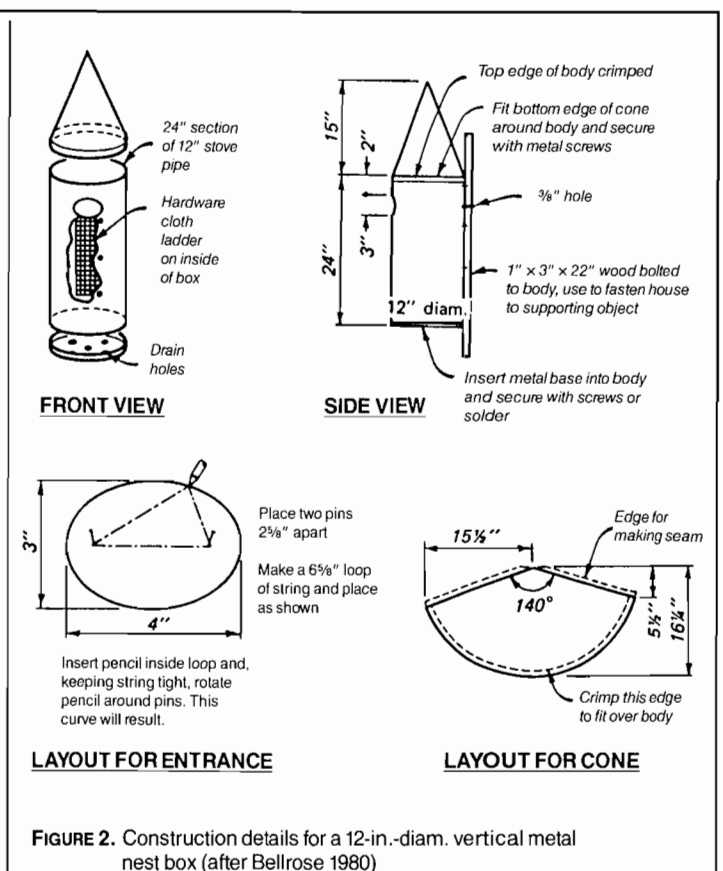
Construction details for a 12-in.-diam. vertical metal nest box (after Bellrose 1980)
